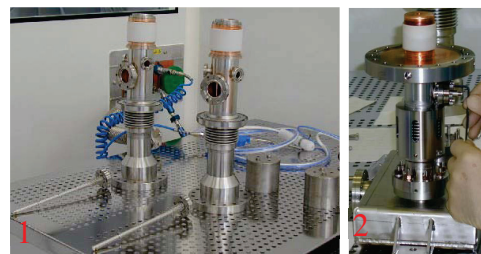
Warm (1) and cold (2) parts after ceramic integration and EB welding of inner and antenna.
